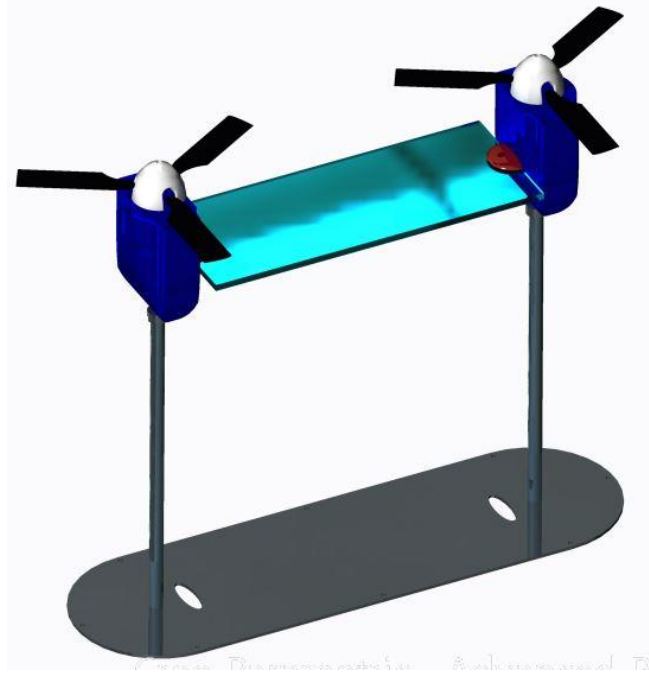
Top view of the wing/rotor configuration in 3D CAD
